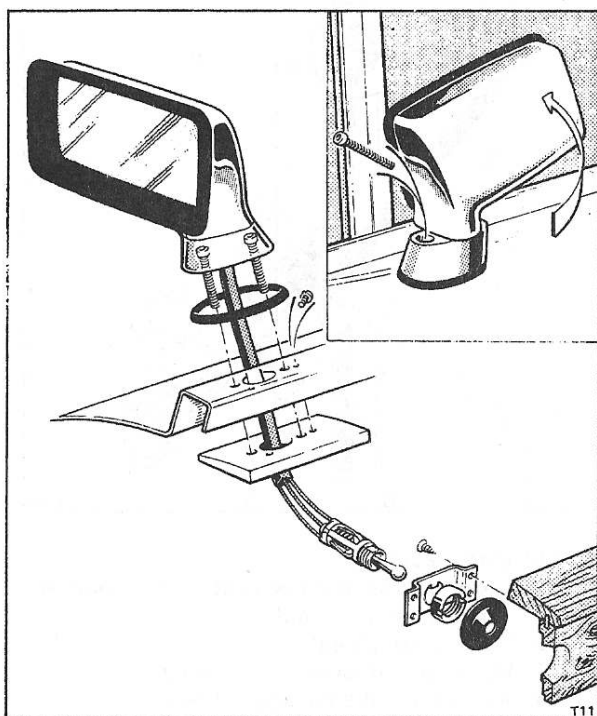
Exterior door mirror (Silver Shadow II, Bentley T2, Silver Wraith II and Corniche)
